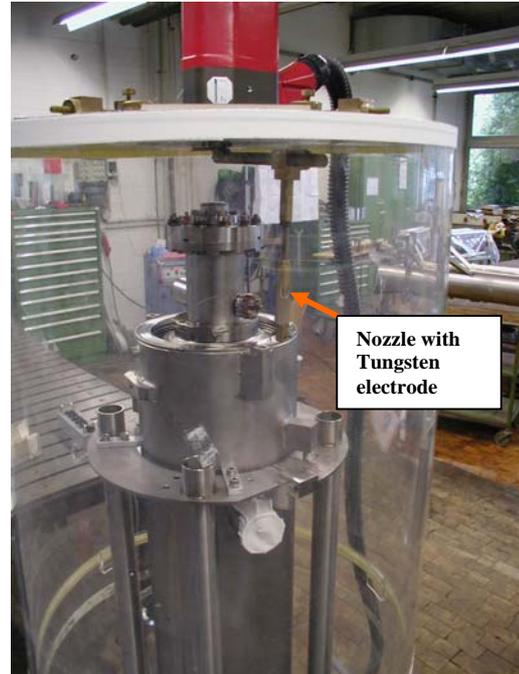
Cavity installed in a welding cabin rinsed with argon
